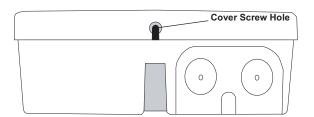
Installation of the wall/cover tamper switch and tinnerman nut
